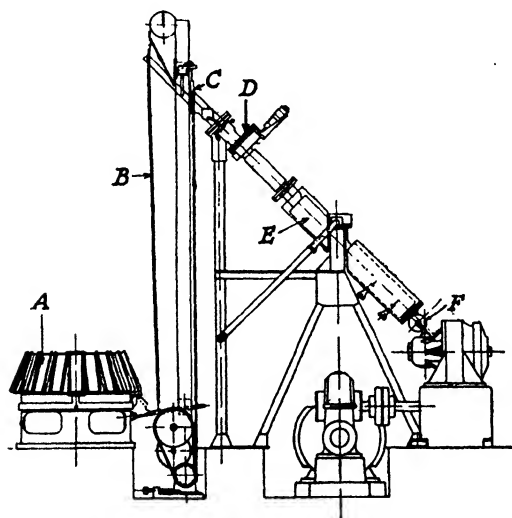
Lead-melting furnace for use with the Henley extrusion machine.
